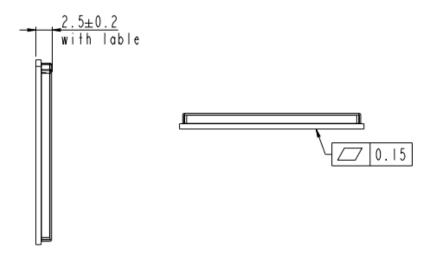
LE910S1 Mechanical Dimensions (Side view)
